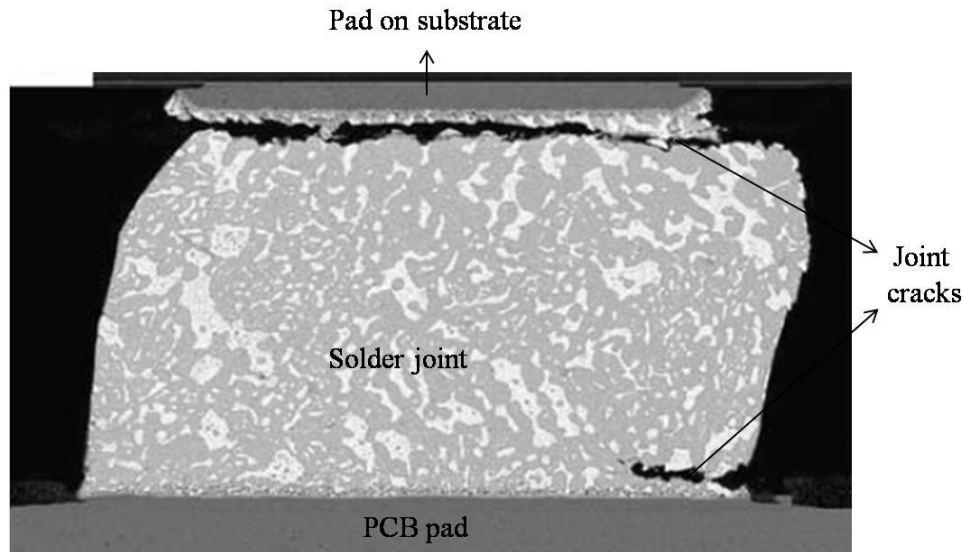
A second level solder joint failure [Freescale, 2004]
